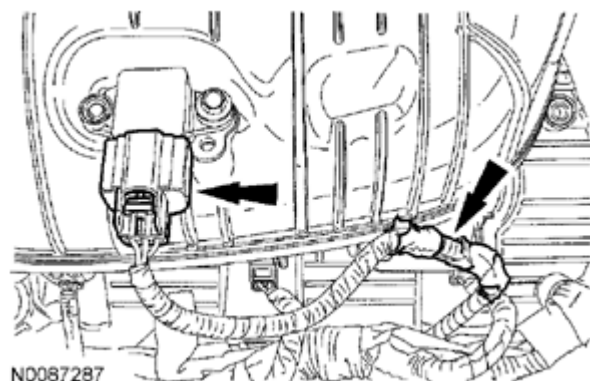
Locating Manifold Absolute Pressure Electrical Connector And Wiring Retainer
